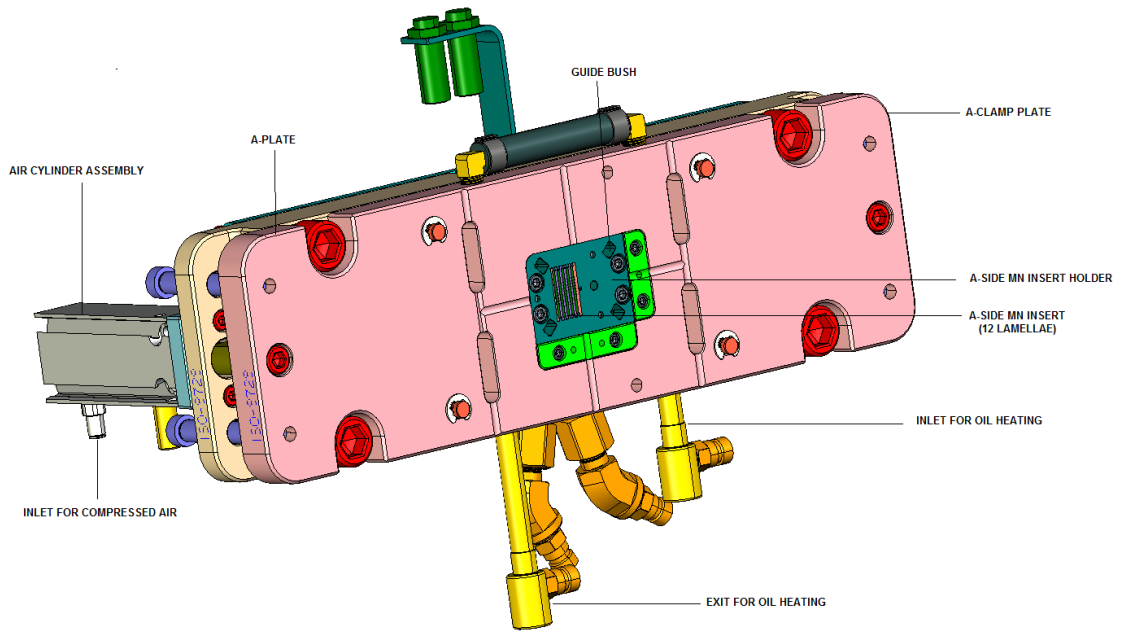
Labelled 3D technical drawing of A-side of the mould assembly showing various components of the mould.
